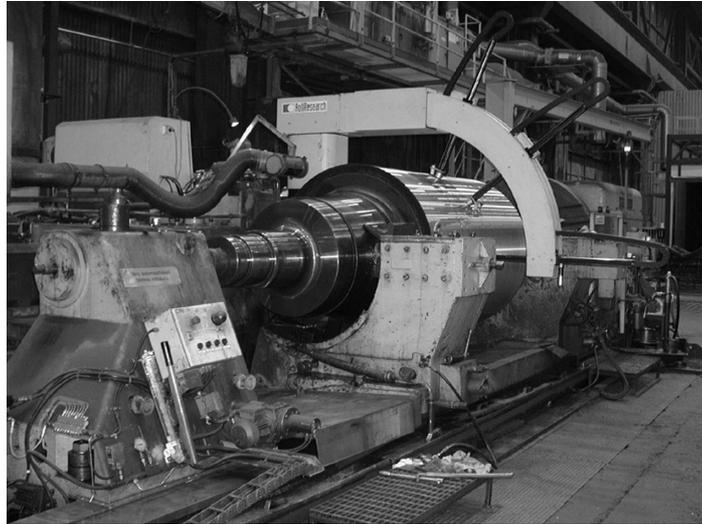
The measuring device and the 3D grinding system installed on a grinding machine.
